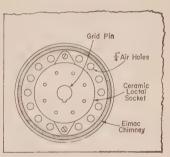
Cheap and easy socket and air system for the 4X150A tubes. The ceramic loctal socket is mounted in a conventional manner on the chassis while the holes and Eimac SK-606 chimney direct air from a blower below chassis.
